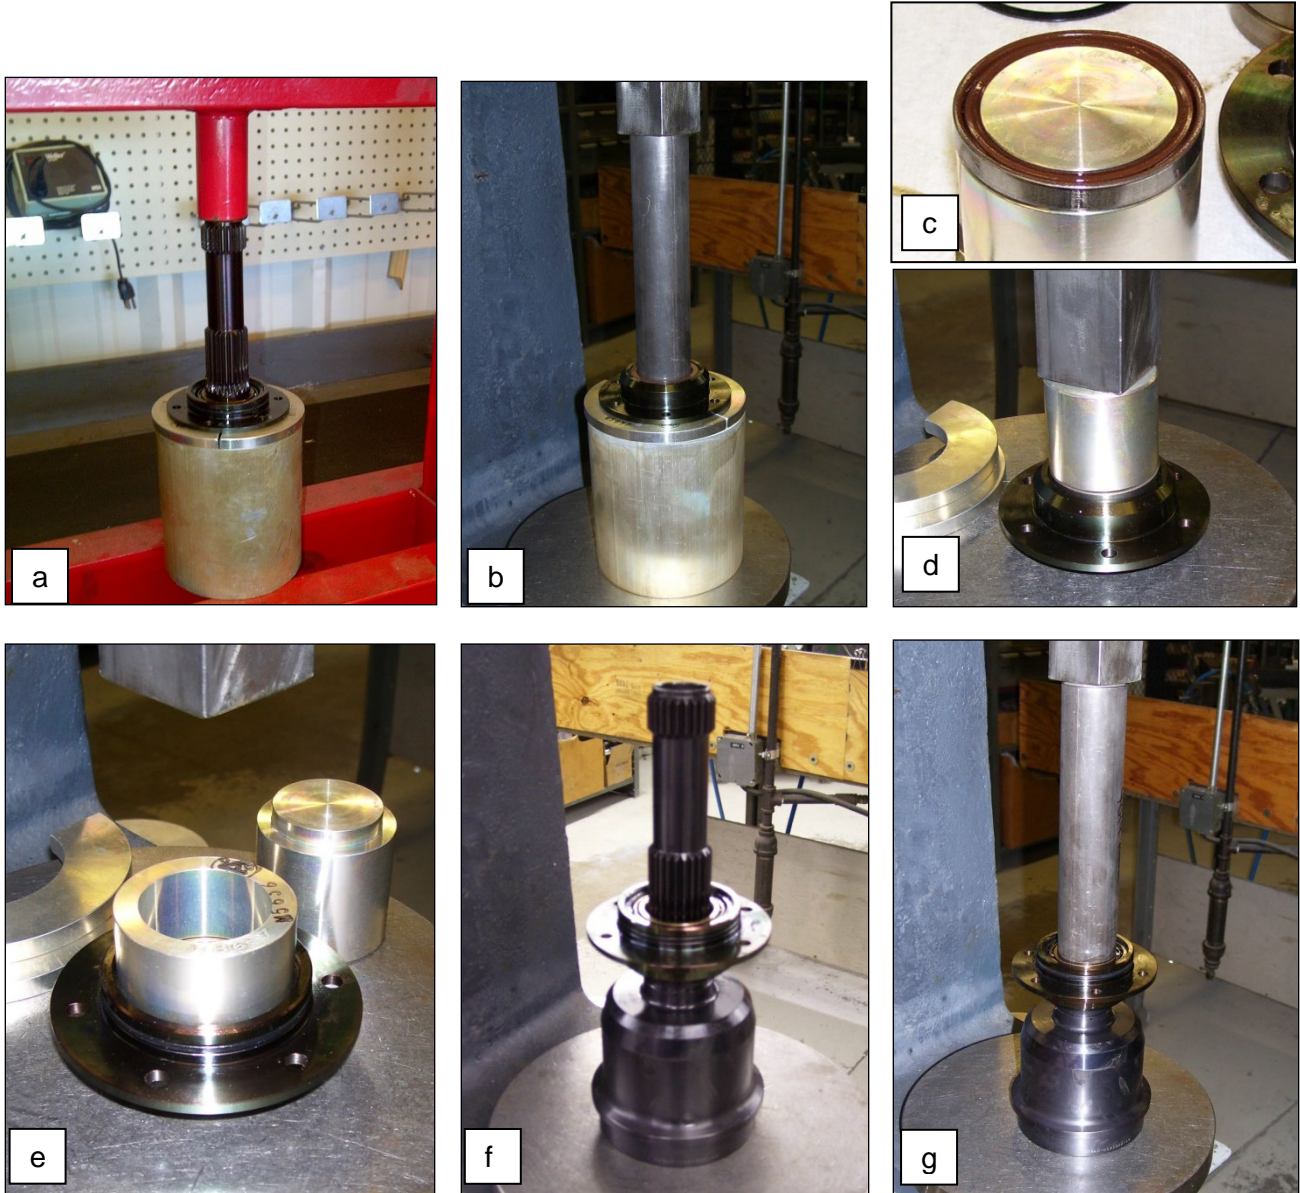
Examples of using tool T-0186 for the ORC assembly and ECD4014 bearing: (a) removing the power output shaft from the bearing housing, (b) removing the bearing from the bearing housing, (c,d) installing the seal into the bearing housing, (e) installing the bearing into the bearing housing, and (f,g) installing the bearing housing assembly onto the clutch shaft.
